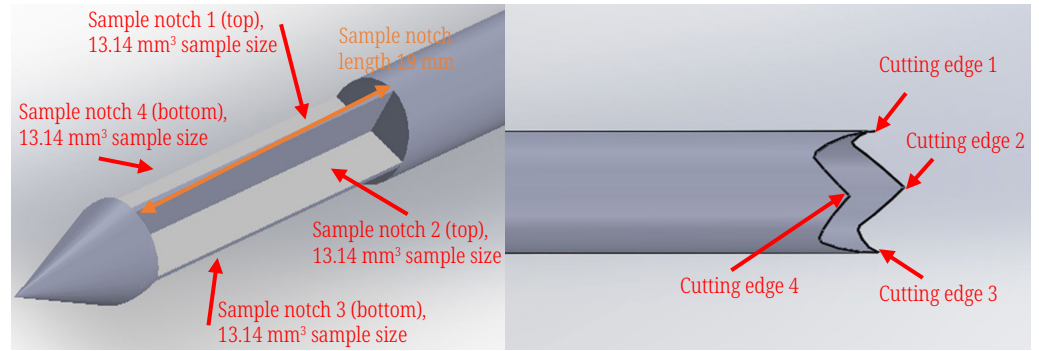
Disassembled zoomed-in view of the designed CBN with 4 sample notches (left) and 4 cutting edges sheath (right)
